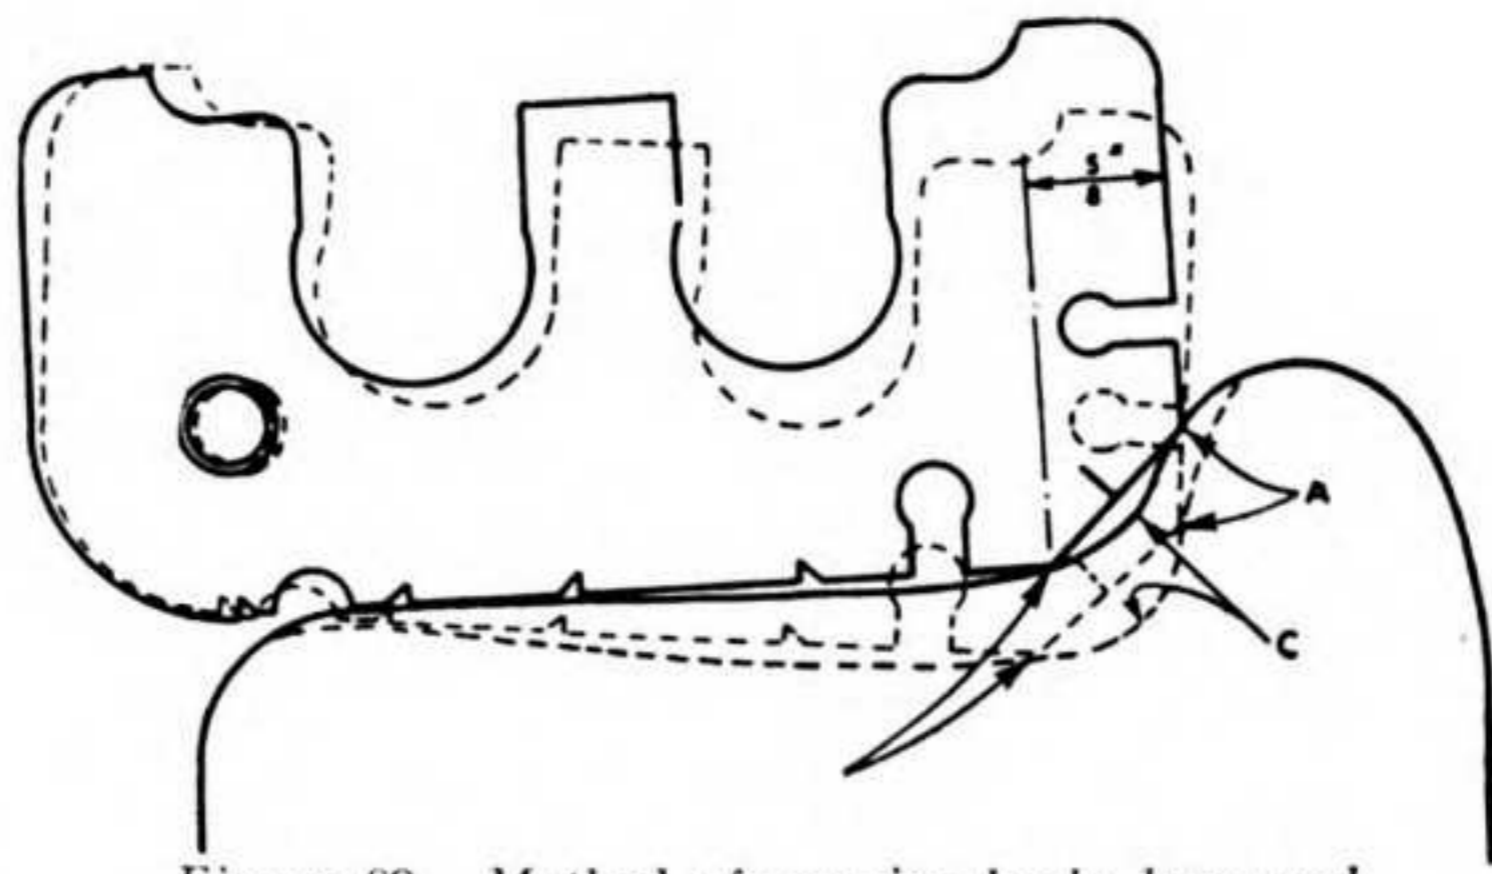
Method of gauging brake burn and transverse cracks, cast-iron wheels.
